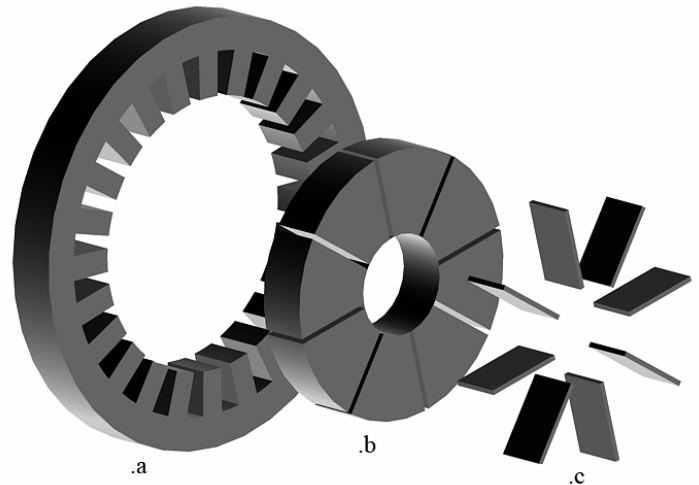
IPM Wheel Motor Magnetic components geometry
